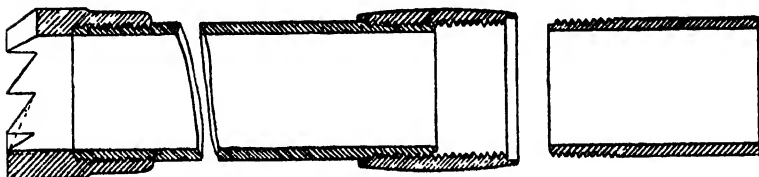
COMMON WELL CASING FITTED WITH ROTARY CUTTING SHOE.
